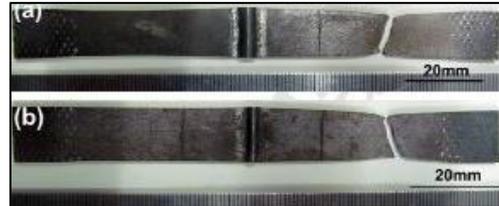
Fractures of tensile specimens: (a) MIG welding specimen, (b) TIG-MAG hybrid arc welding specimen
